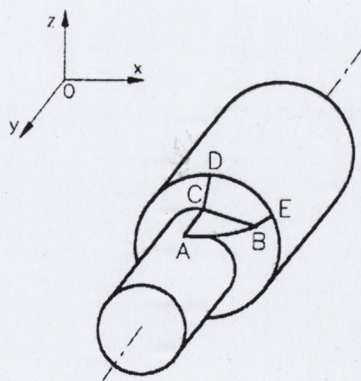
Contact surface on a workpiece for a CWR process [42].
